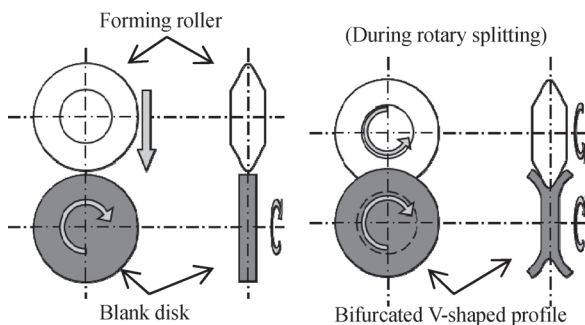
Rotary splitting of a circular disk using a driving blank and a driven forming roller.
